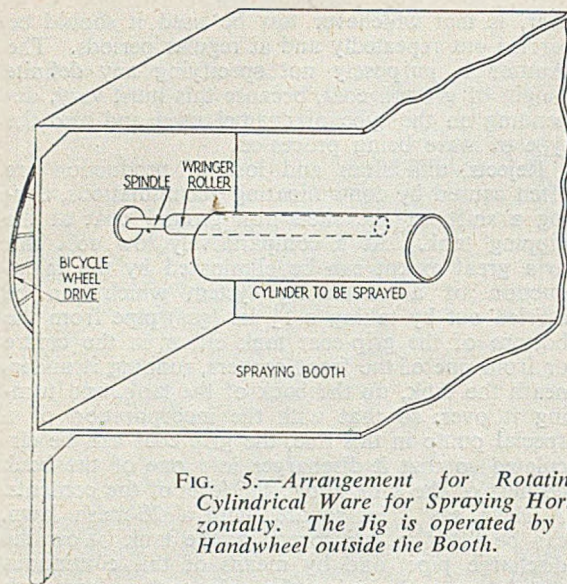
Arrangement for Rotating Cylindrical Ware for Spraying Horizontally. The Jig is operated by a Handwheel outside the Booth.
